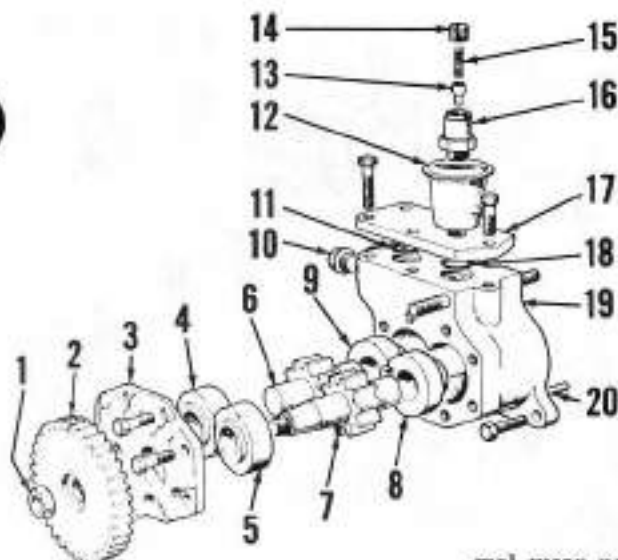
Exploded view of early type (Dowty) hydraulic pump assembly. Later relief valve for Dowty pump bolted directly to pump body instead of using separate mounting plate (17).
